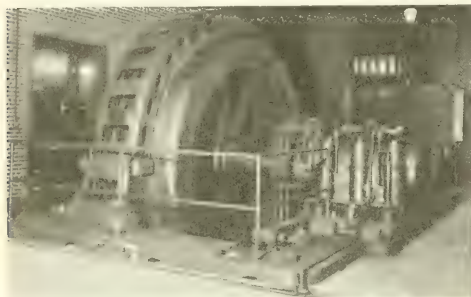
5000 HP MOTOR DRIVING 132 INCH, 3 HIGH MILL. The liquid slip regulator is shown in the background.
